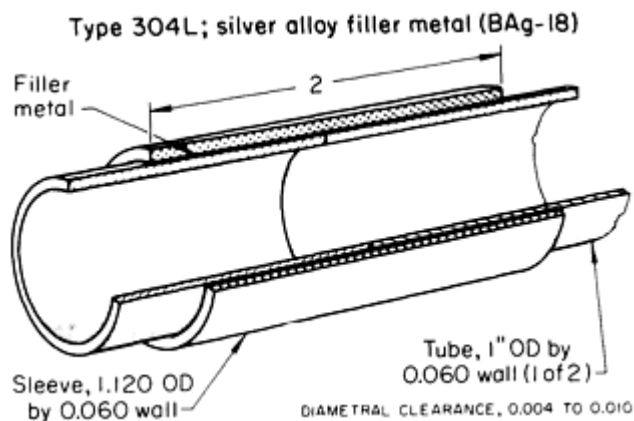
ASSEMBLY THAT WAS TORCH BRAZED WITH A SILVER BRAZING FILLER METAL FOR USE IN A HIGH VACUUM ATMOSPHERE SYSTEM
